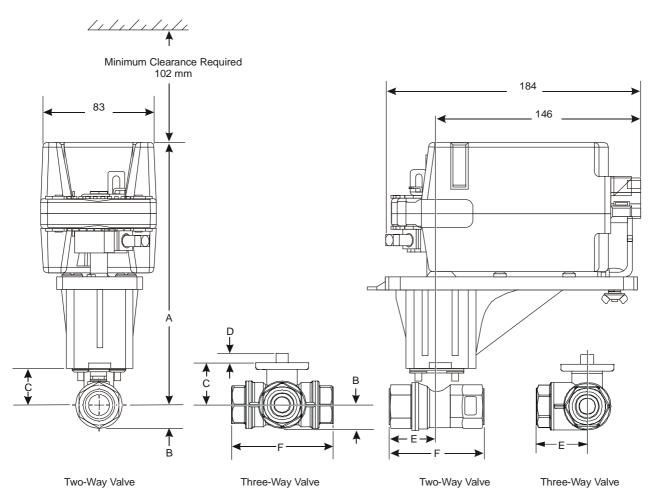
Spring Return M9206 actuated VG1000 Series ball valve with M9000-520-5 Linkage Dimensions, mm.
